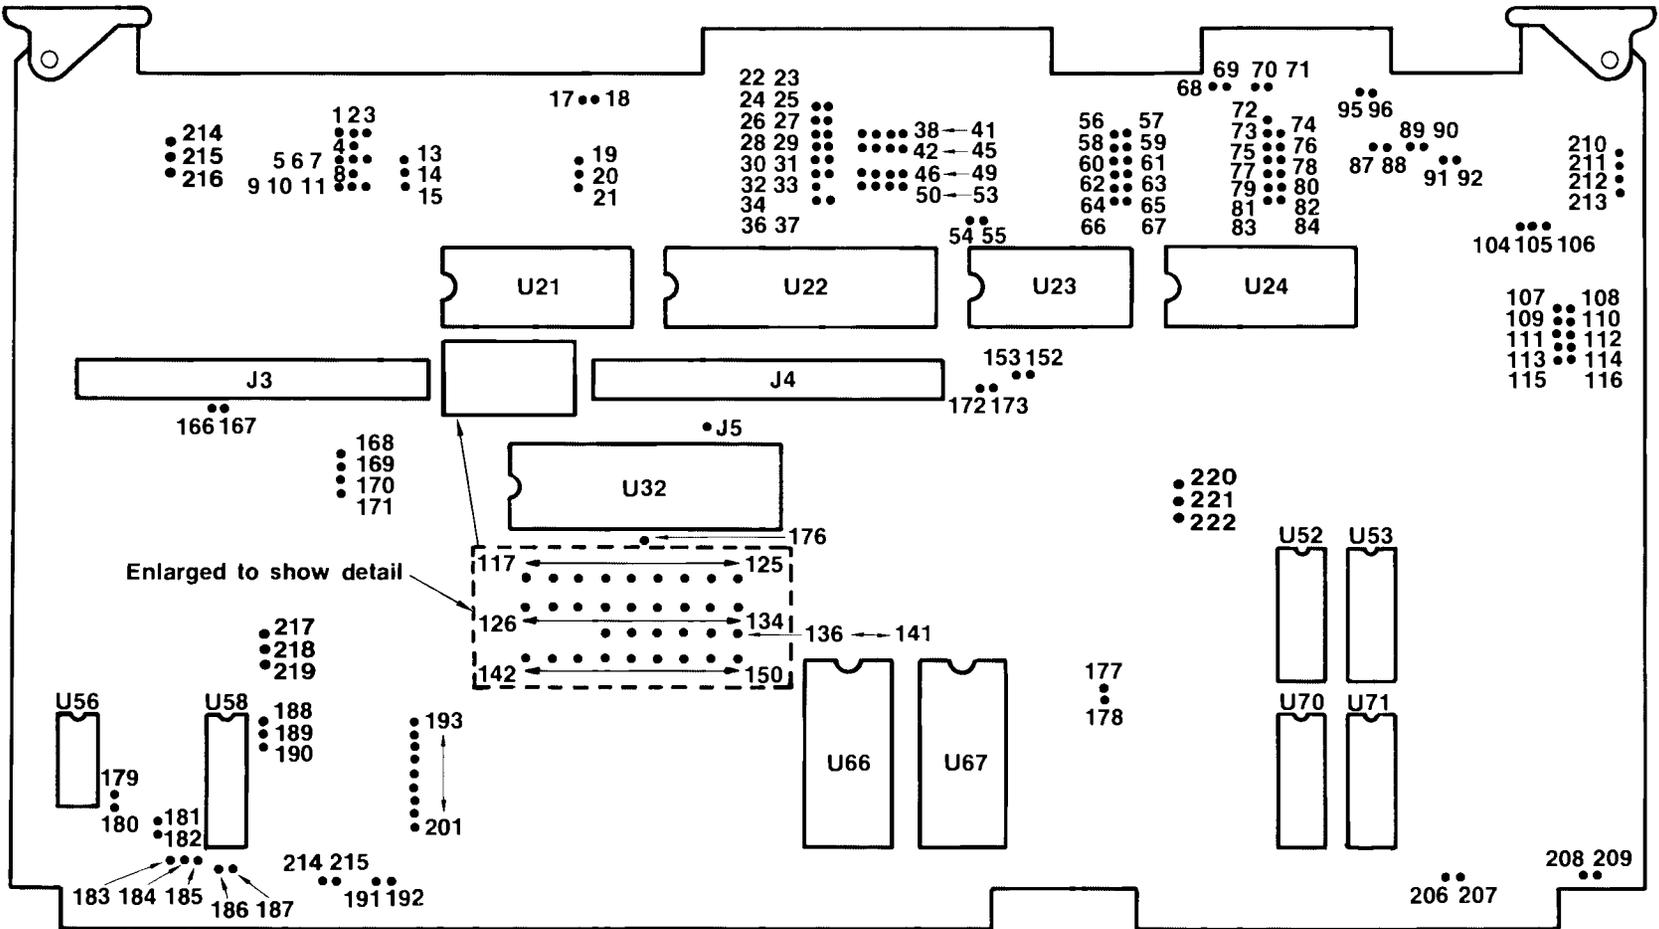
ISBC® 86/05 Board Parts Location Drawing
